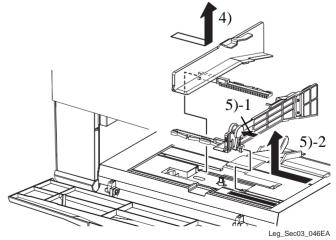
Removal of GUIDE SIDE L and GUIDE ASSY SIDE R (2)
